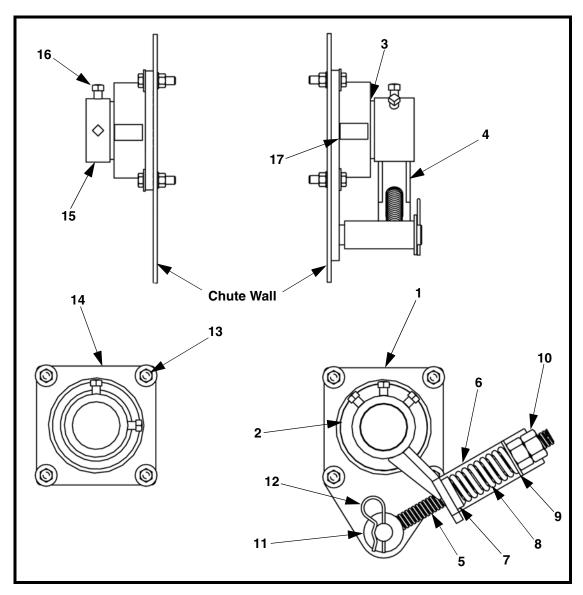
Martin<sup>®</sup> Spring Tensioner XHD Assembly, P/N 38003
